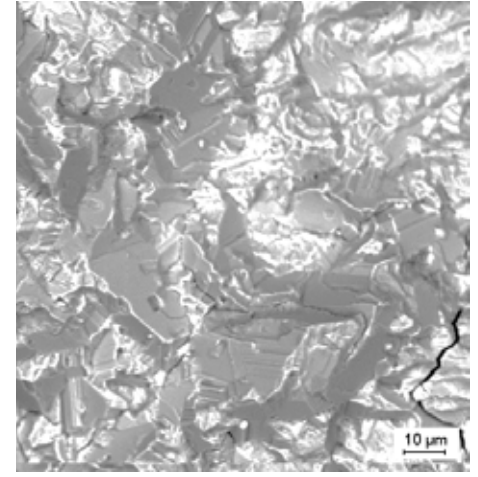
Fractography showing coarse grain failure as the primary crack initiation site.
